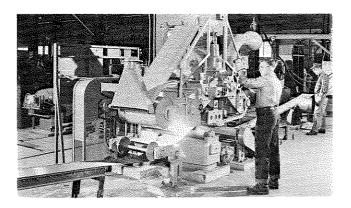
Continuous Strip Grinder Used to Condition the Surface of Semi-finished Strip Before Final Cold Rolling.
